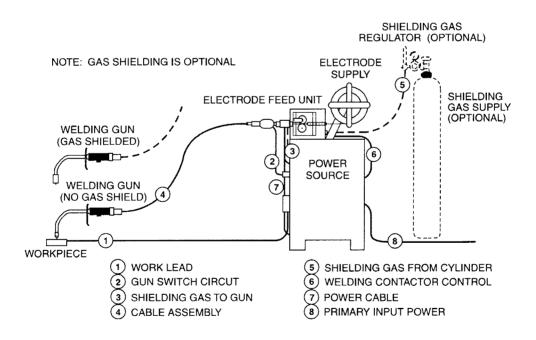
Diagram of Flux Cored Arc Welding Equipment
